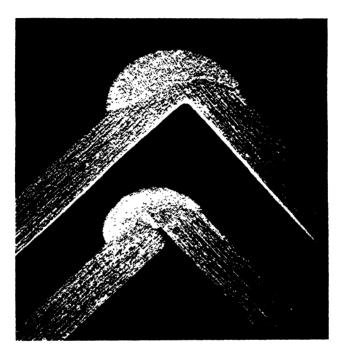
Outside corner welds (a 4X macrograph) showing a properly penetrated weld at the top and a partially penetrated weld at the bottom
